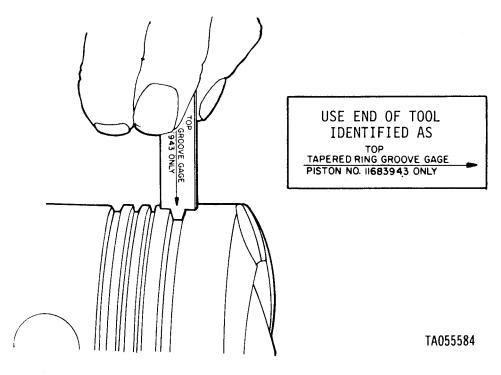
Checking piston top ring groove using tapered piston ring gage.
